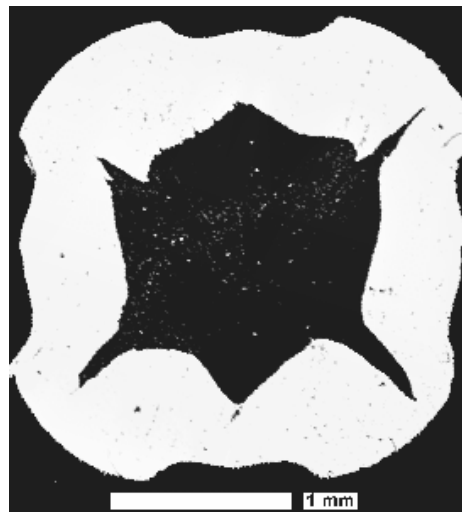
Axial cross section of groove rolled wire having $\sim 2.5 \times 2.5 \text{ mm}^2$ outer dimensions
